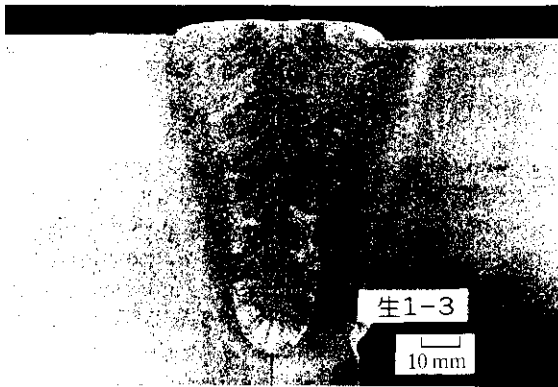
Cross sectional macrostructure of the 3-electrodes, 1 pass submerged arc welding for heavy section plate of 80 mm in thickness
